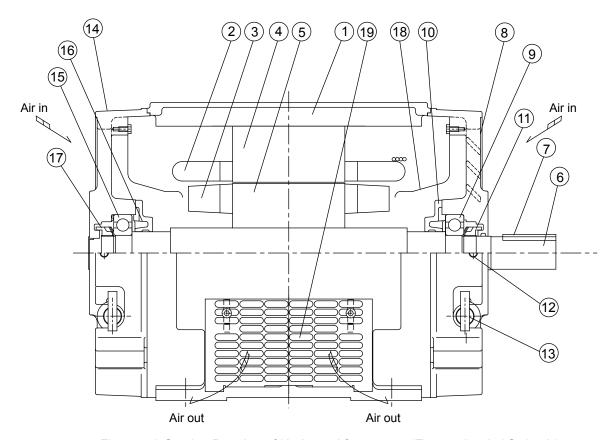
Section Drawing of Horizontal foot mount (Frame size 250S~355L)
